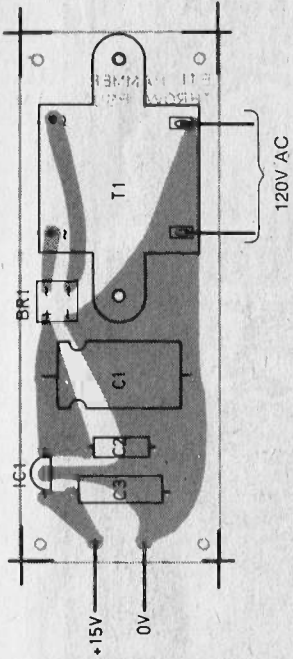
Component overlay of PSU, line ground is connected to T1 by a solder tag under the mounting bolt.
